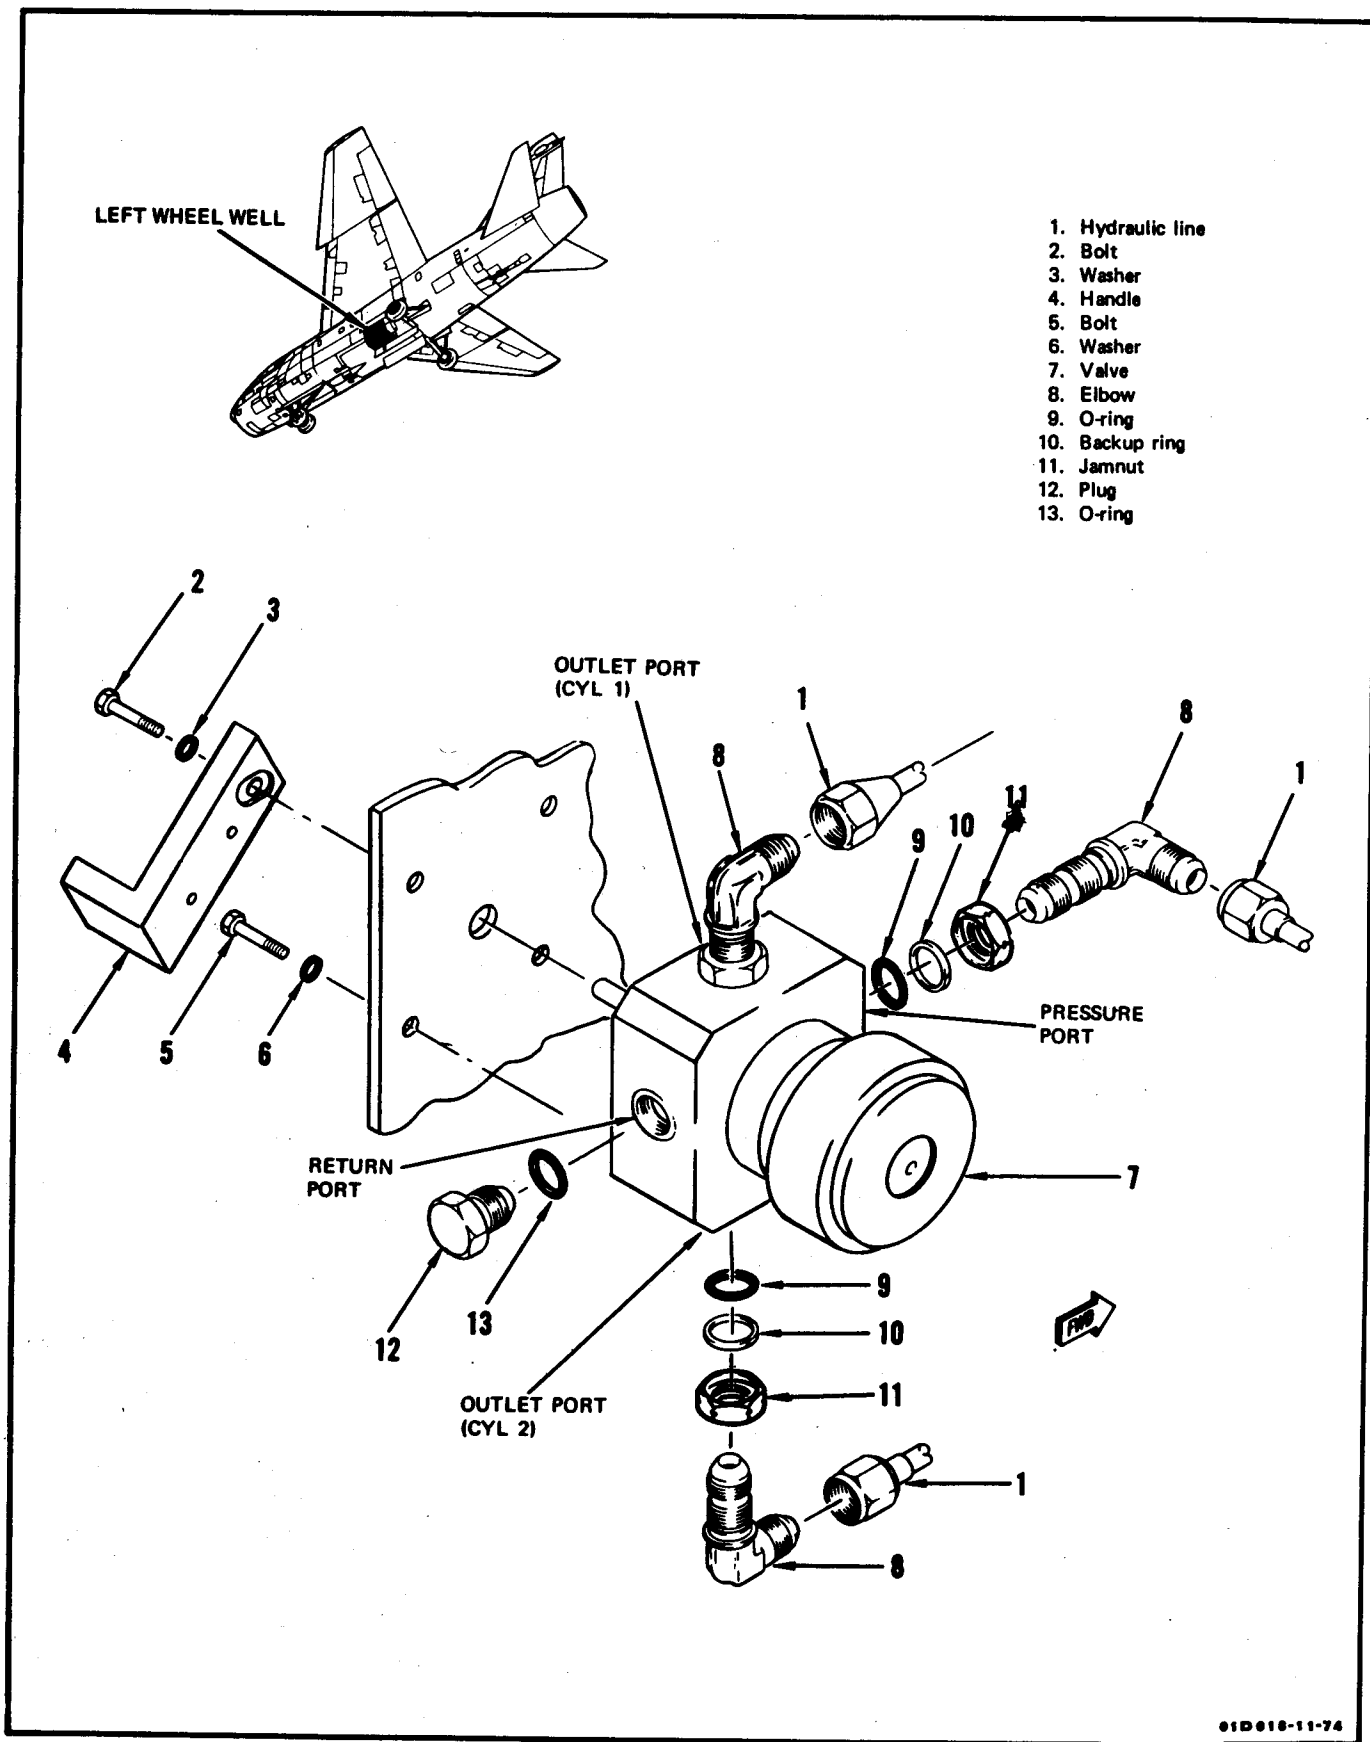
Wingfold Manual Selector Valve Removal and Installation
